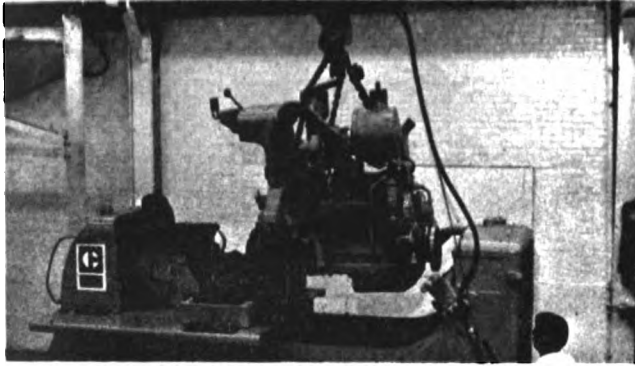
Preparing to remove engine (sheet 6 of 6).
